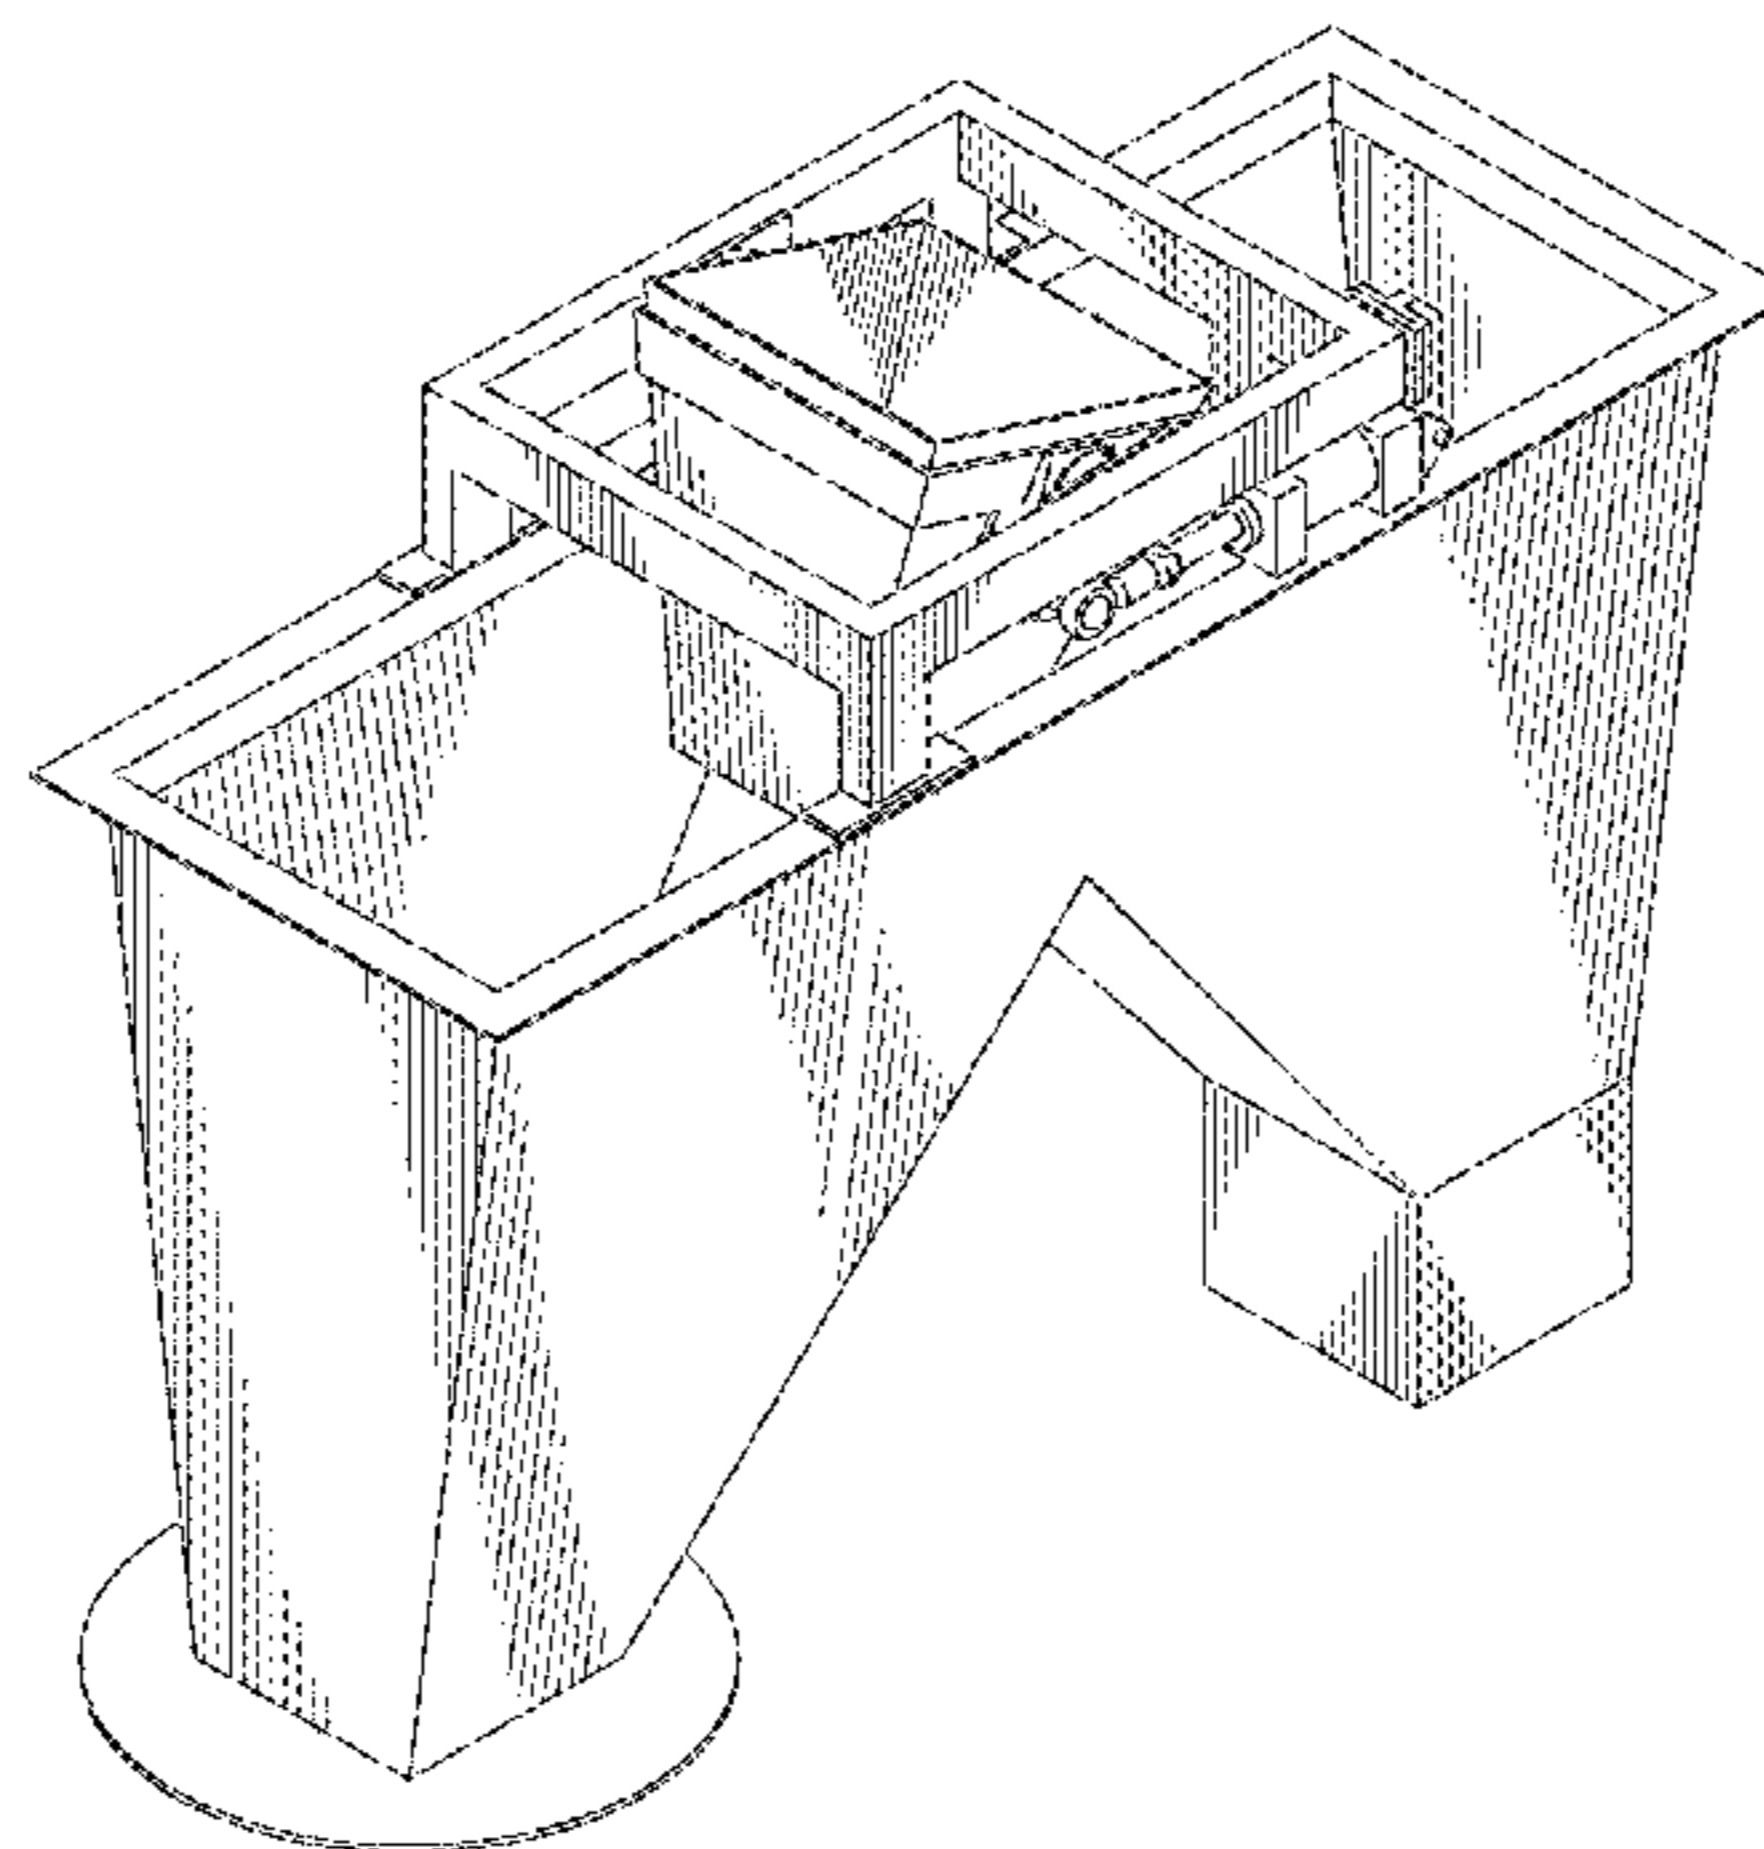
is a left side view of the feed chute for molding sand with damper for flask-less molding machine of FIG. 1.
